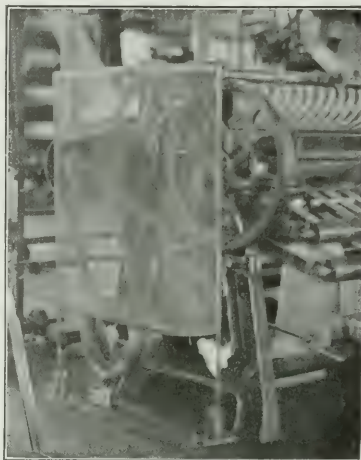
Removable-Wire-Mesh Guard Around the Gears of a Cutting Machine.
